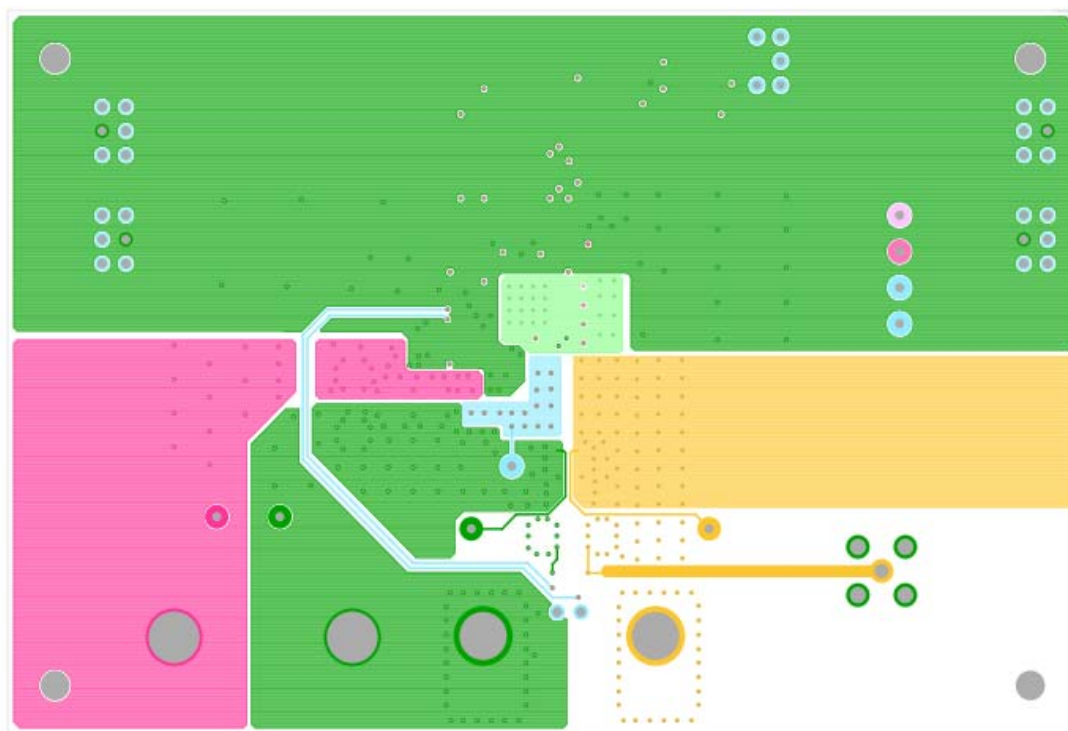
PCB - Inner Layer - Layer 3 (Top View)
